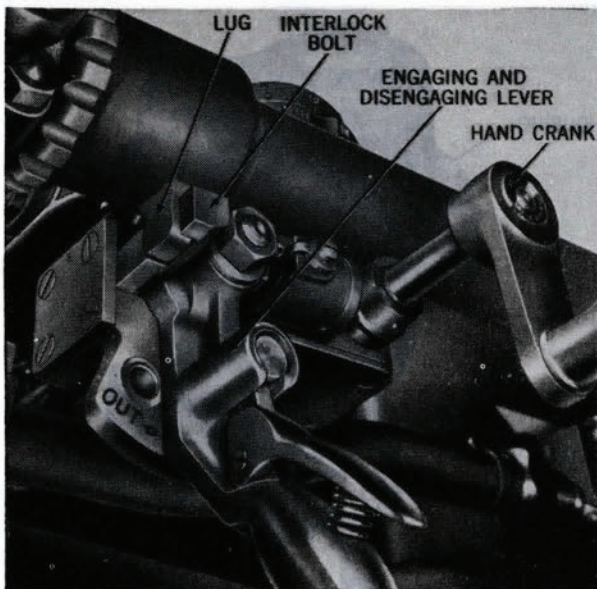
Depth Setting Mechanism Installed—Right-Hand Tube—Spindle OUT.
